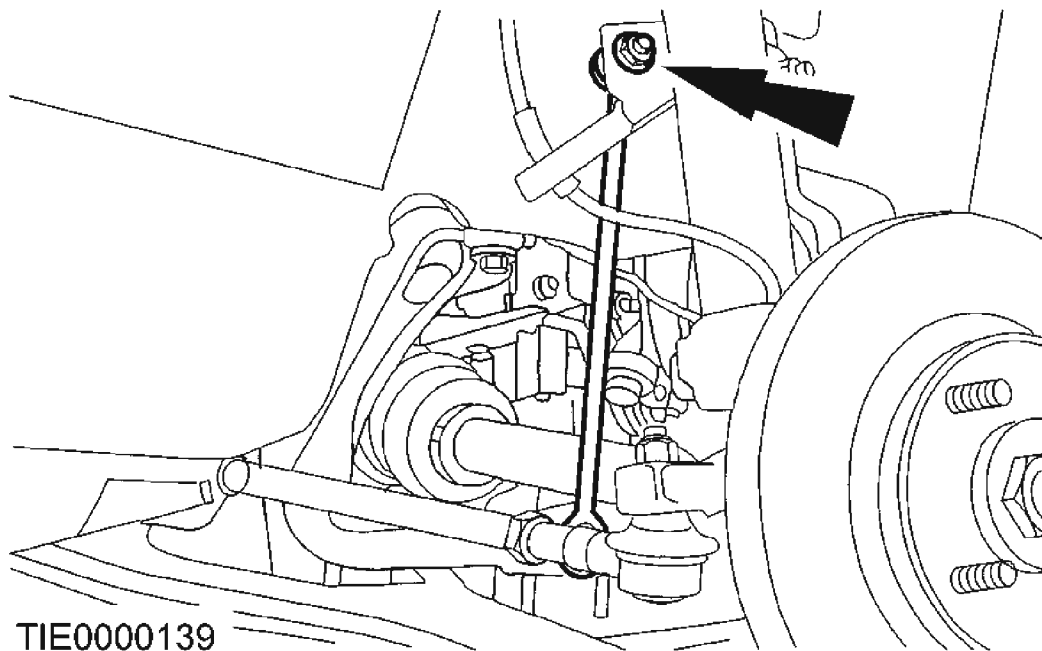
Removing Stabilizer Bar Link Nuts On Both Sides
